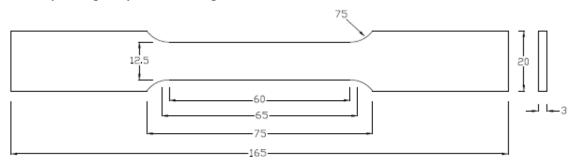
Standard Tensile Test Specimen. All dimensions in mm for plane specimen [ASTM E9M]
